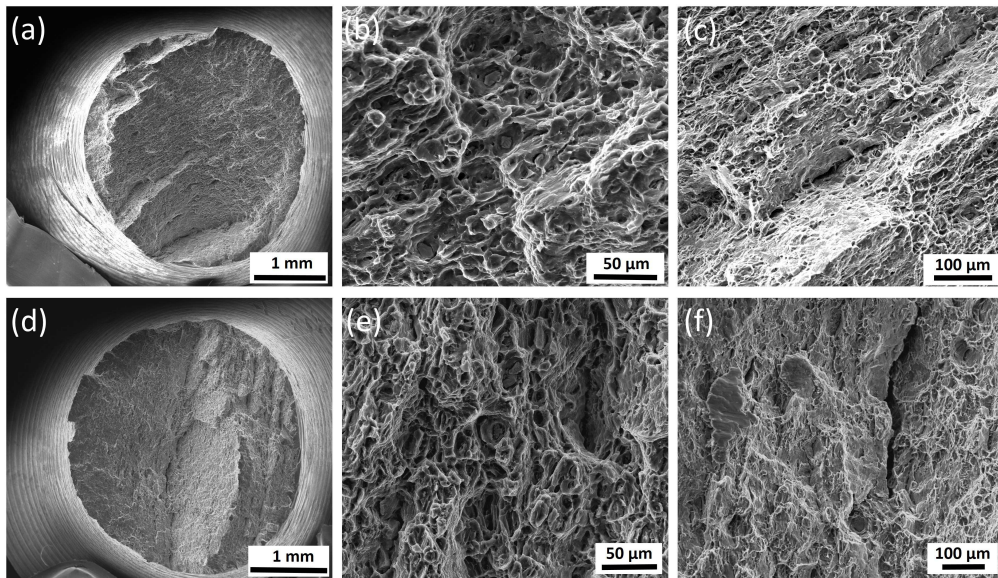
Fracture surface of RN10 specimen (a)-(c) 4A and (d)-(f) 4C samples showing dimpled fracture surface with particles in the dimples showing ductile fracture mechanisms are active.
